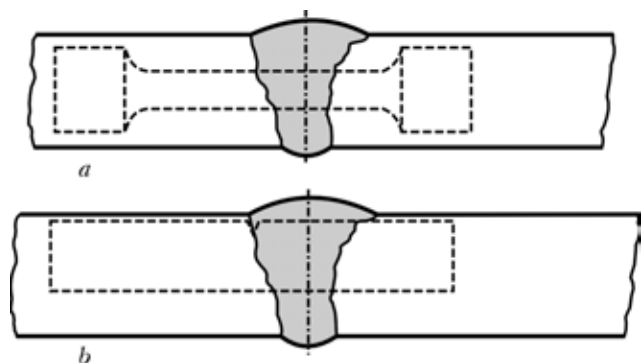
Schematic of a sample connection to the unit when performing EPhT of welded joint metal
